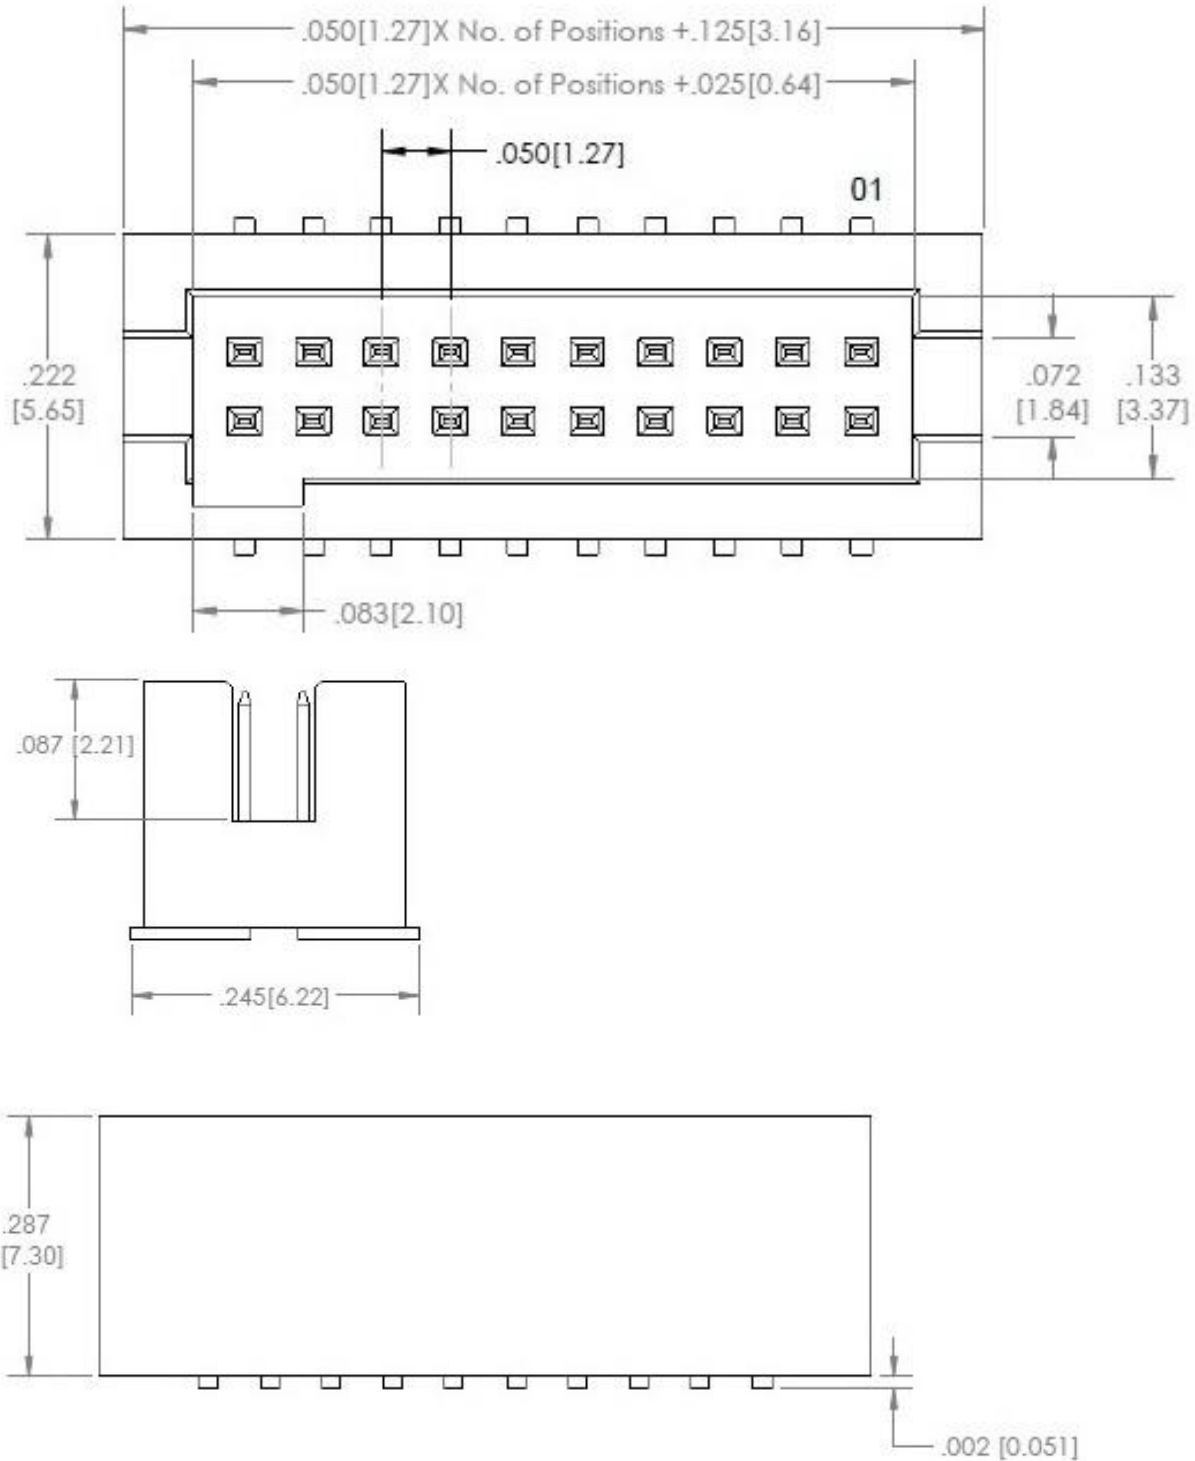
Pin header physical dimensions (dimensions are in inches [millimeters] )
